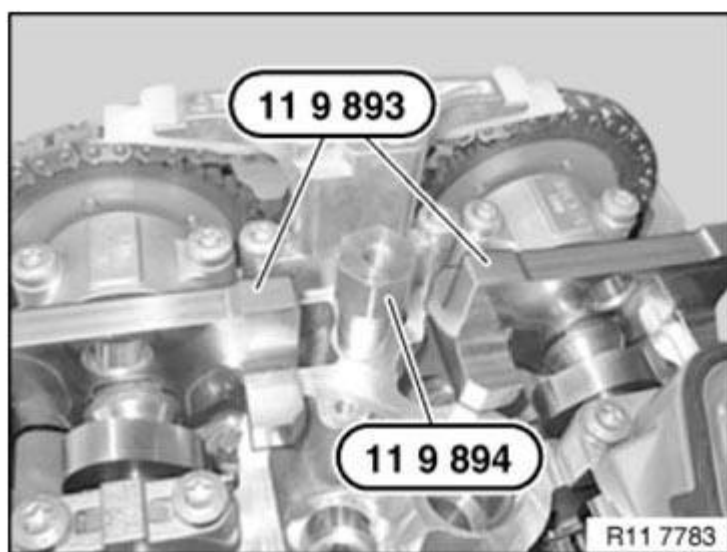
Positioning Special Tool 11 9 893 On Intake Camshaft And Exhaust Camshaft
